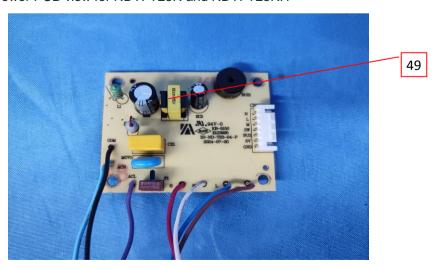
Power PCB view for NDTFT23R and NDTFT23RH
